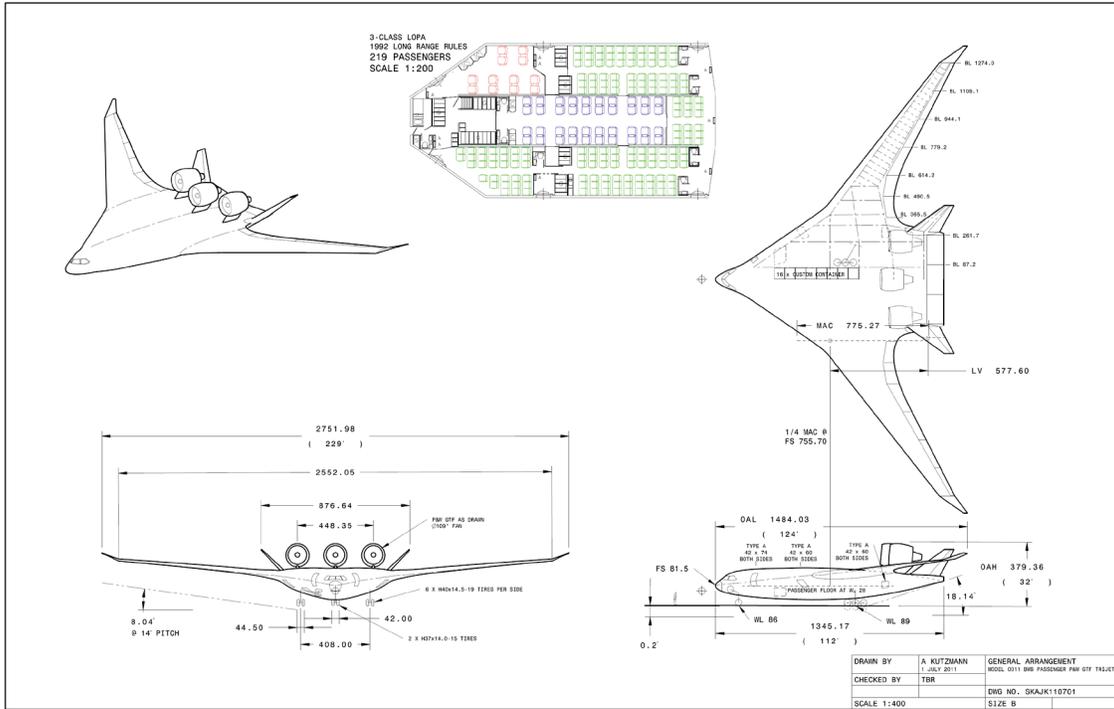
General Arrangement Drawing – 2025 BWB-0011 Passenger
